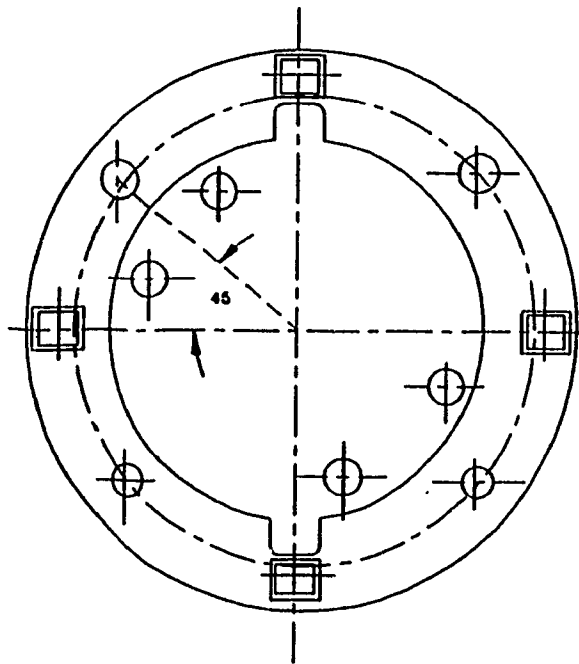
Wheel Mounting Brackets for the Motor-in-wheel Drive Units
